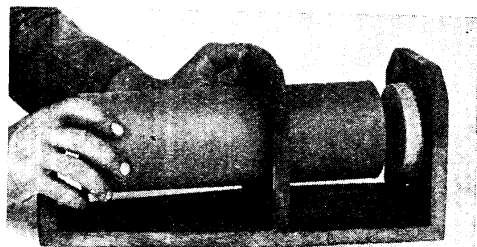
In the middle of the frame seen in Fig. 8 a guide is erected and the cardboard tube inserted
